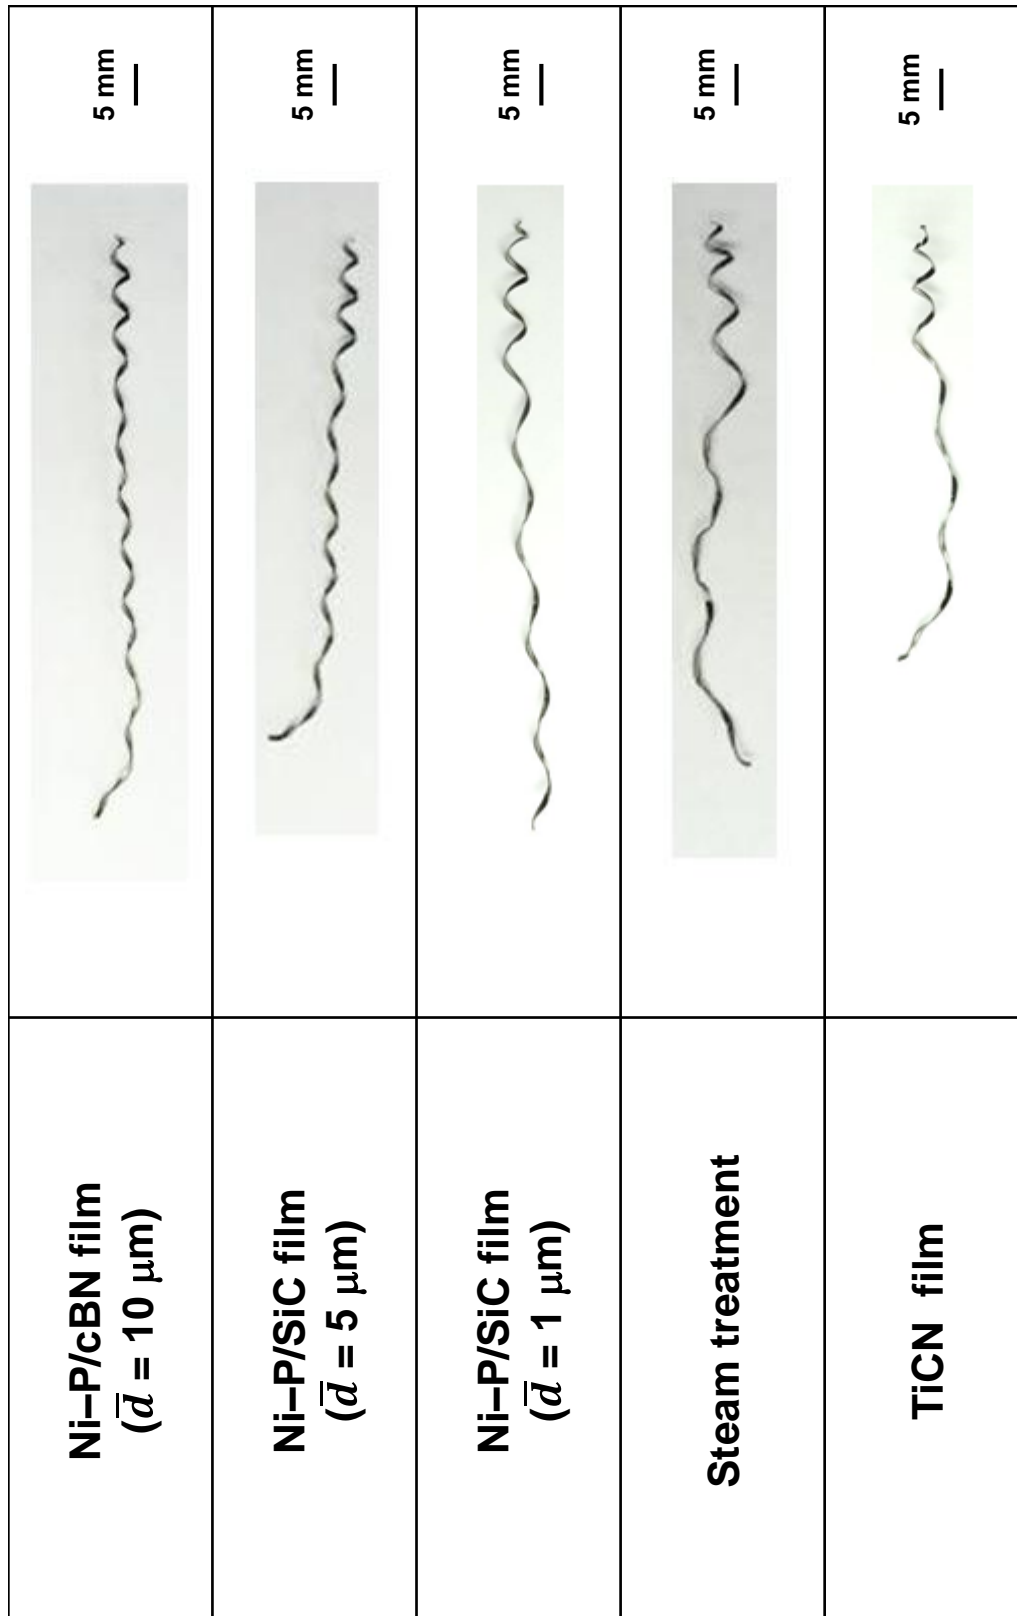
Cutting chip for the 4th cutting edge at 50 m/min
